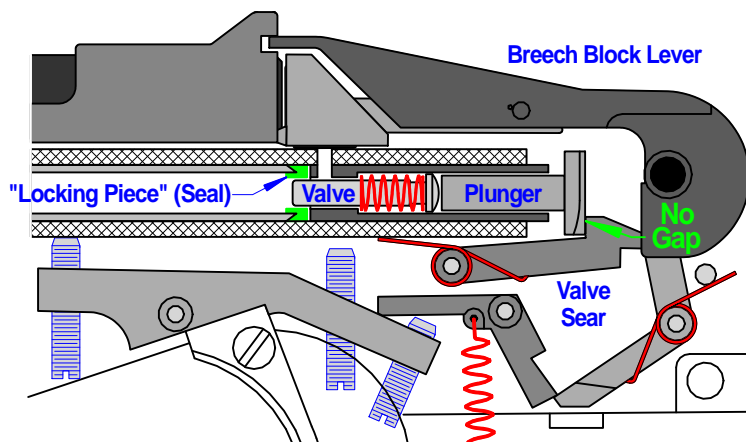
Plunger & valve retract until plunger is caught by sear when lever is closed
